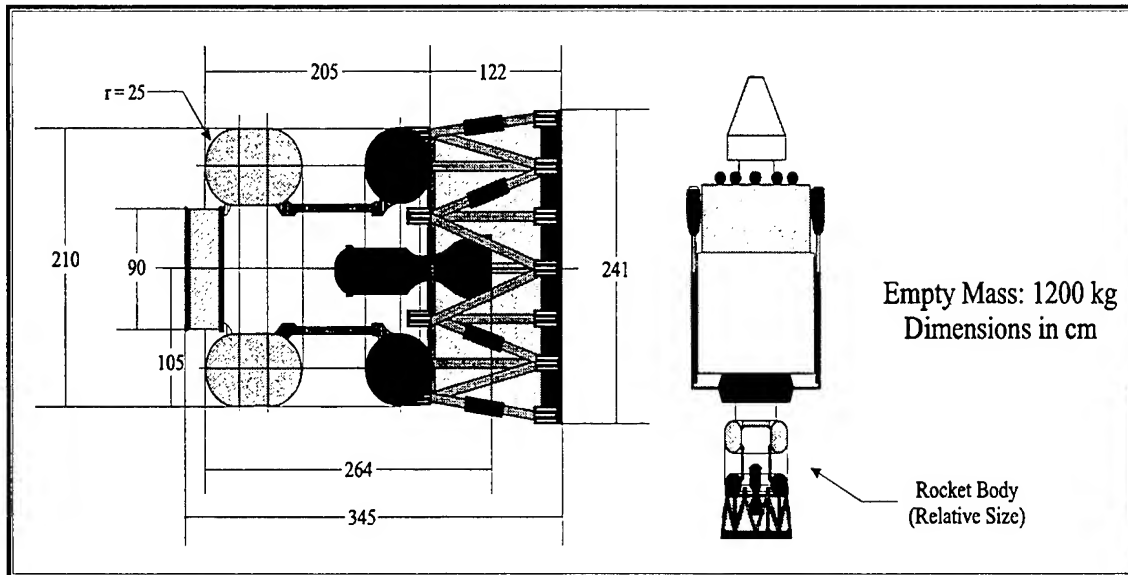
Molniya A6e-SL6, Block L Rocket Body Technical Drawing [30]
